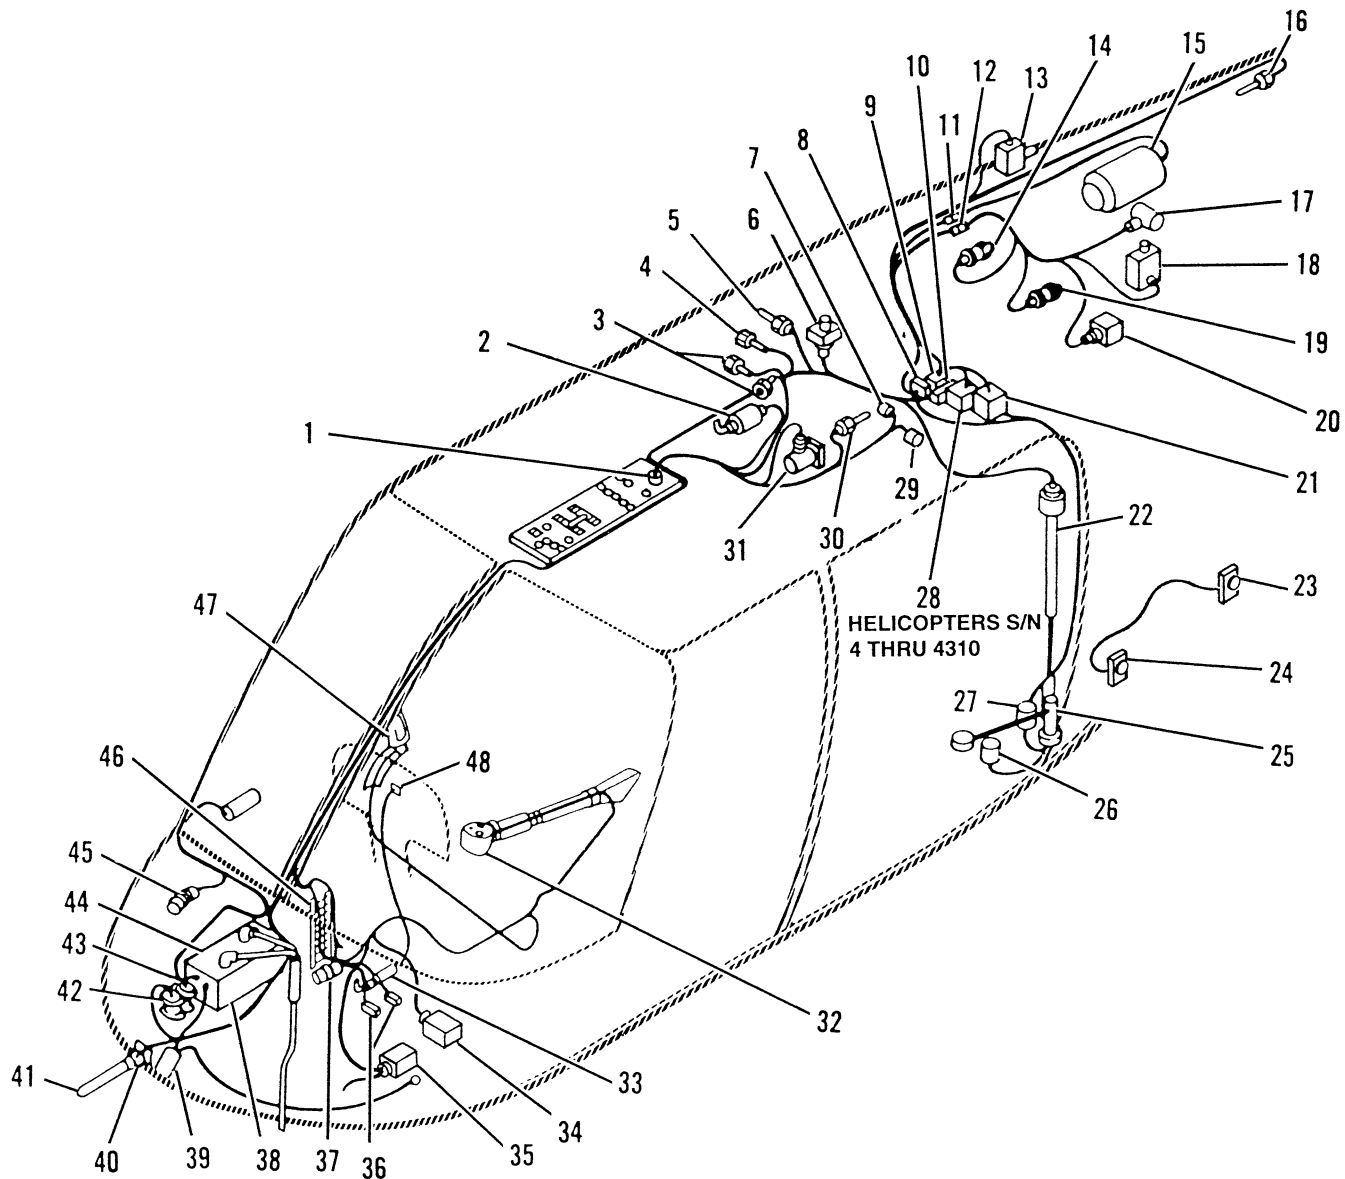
Electrical equipment location (Sheet 1 of 7)
